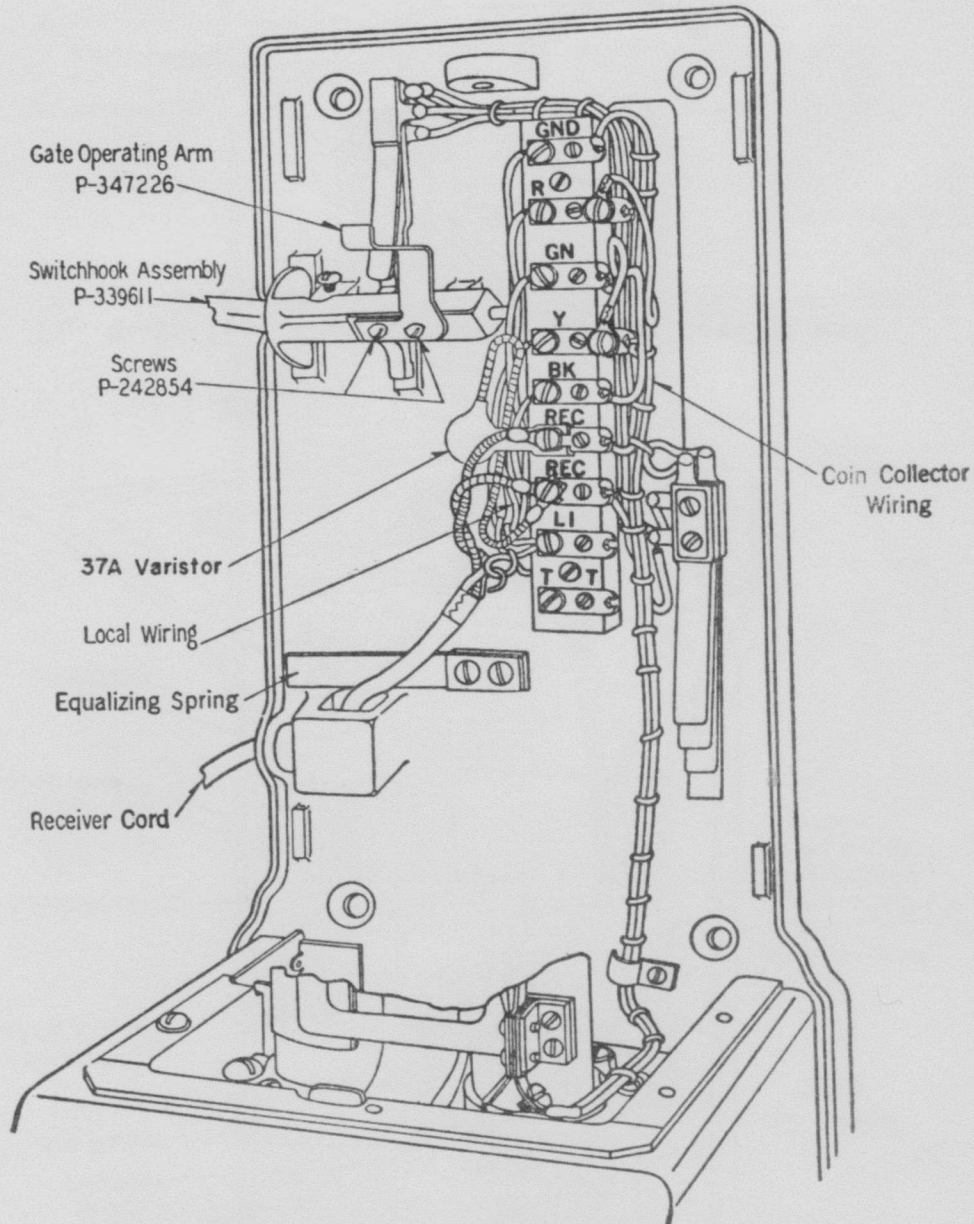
55-Type Coin Collector—Lower Housing and Backplate
